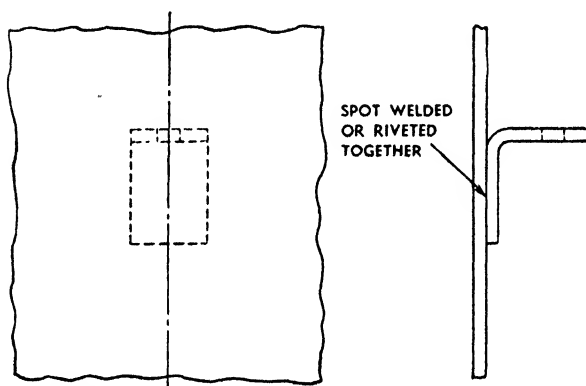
Tab formed separately and welded or riveted in place.
